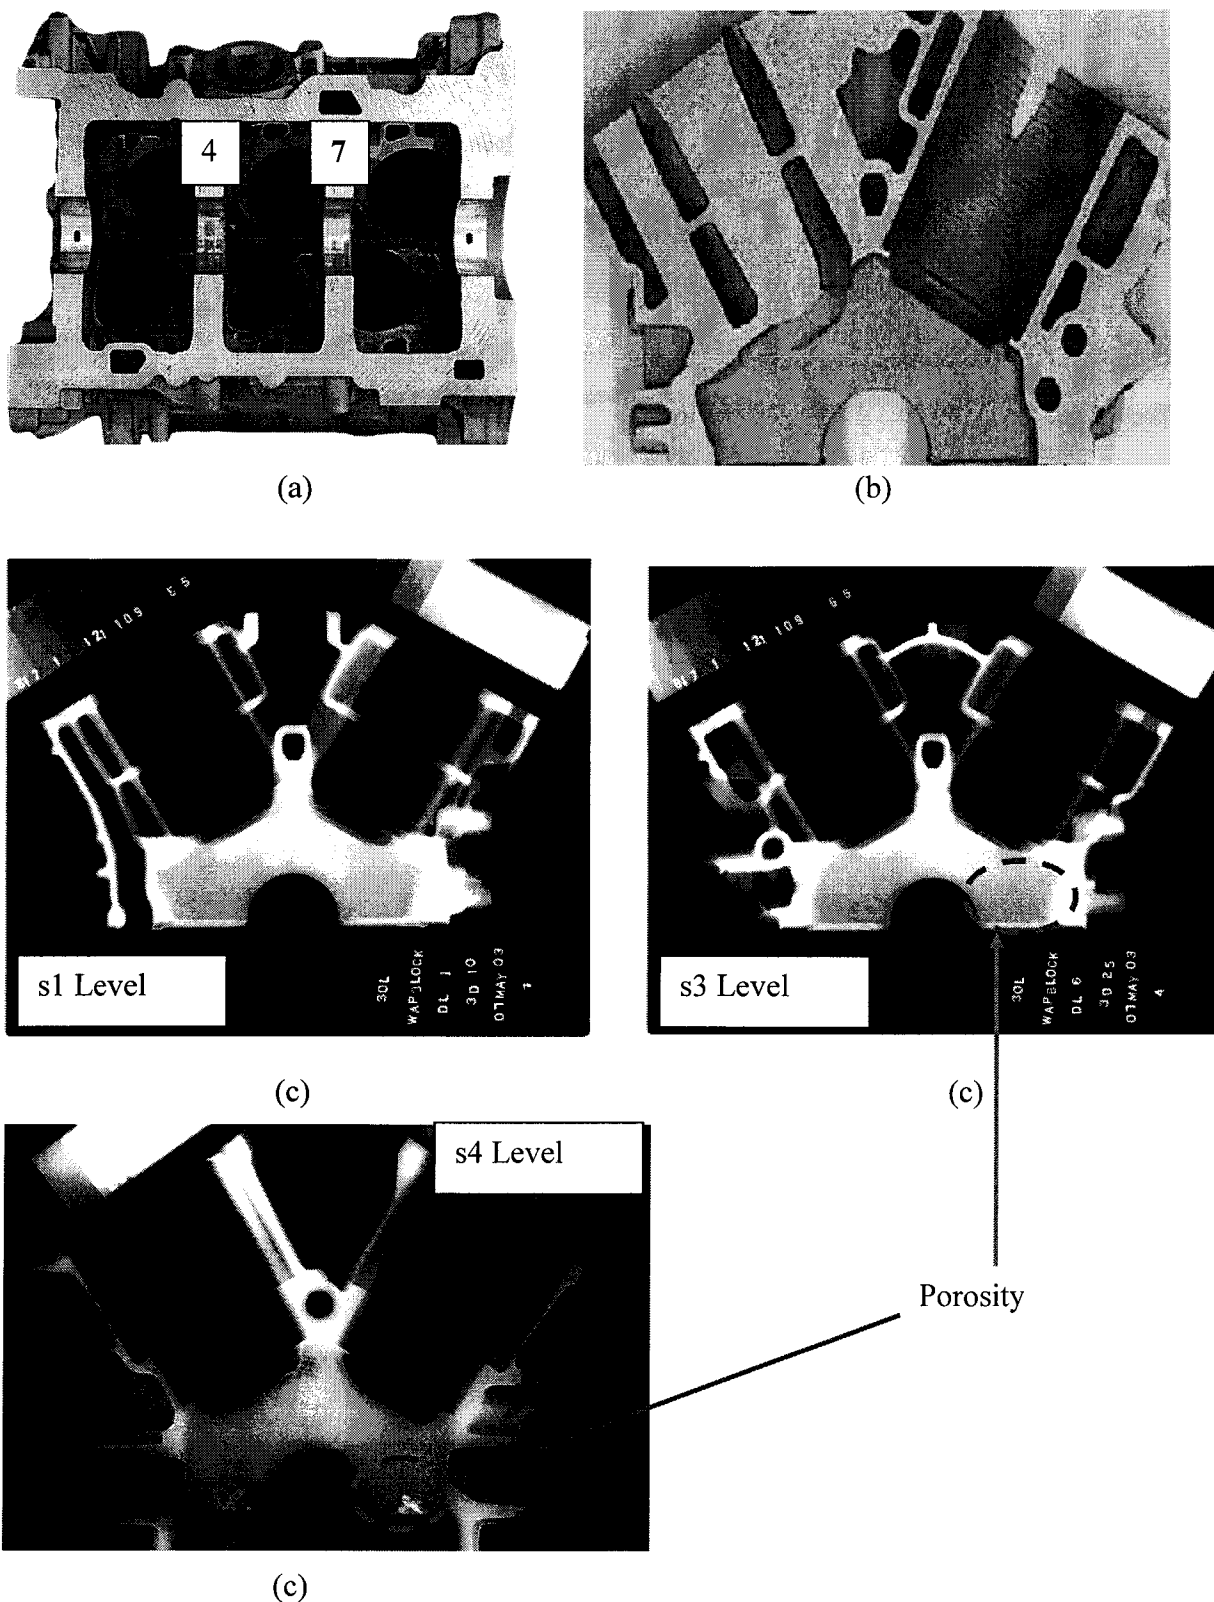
(a) Locations of bulkhead Sections 4 and 7 in the 3.0L V6 engine block, (b) Cross Section view of a bulkhead Section (c) X-Ray Radiographs of bulkhead Sections with porosity levels s1, s3 and s4.
